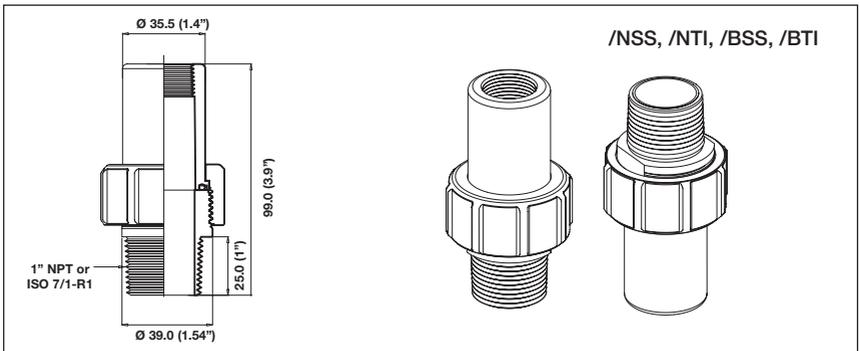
Dimensions of quick-removal adapters /NSS, /NTI, /BSS, /BTI
